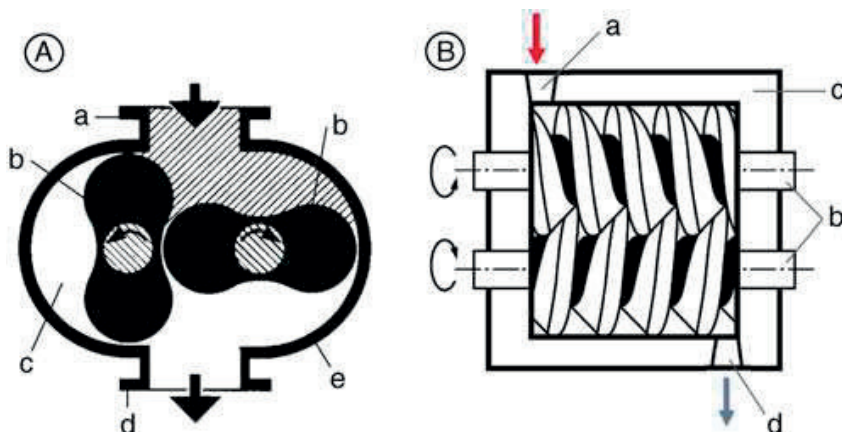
Schematics of twin shaft rotary positive displacement pumps. A) Roots pump: a) Intake flange; b) Rotors; c) Chamber; d) Exhaust flange; e) Casing; B) Screw pump: a) Inlet; b) Screw rotors; c) Housing, reproduced with permission of Leybold; d) Outlet, reproduced with permission of Pfeiffer Vacuum.
